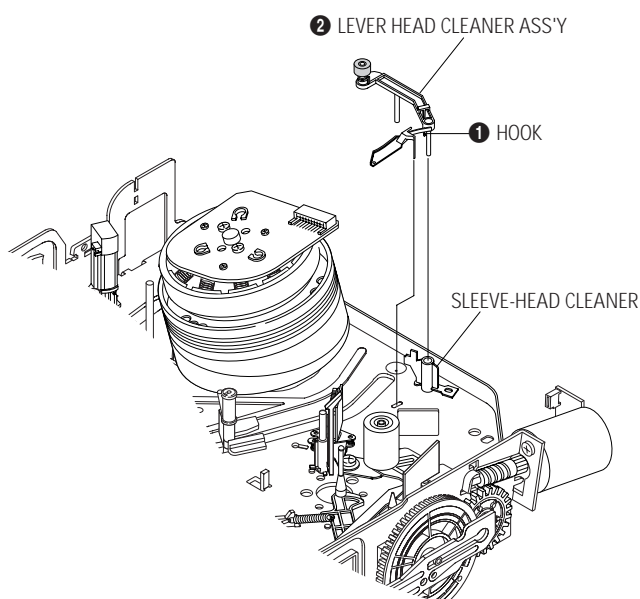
Lever Head Cleaner Ass'y Removal
